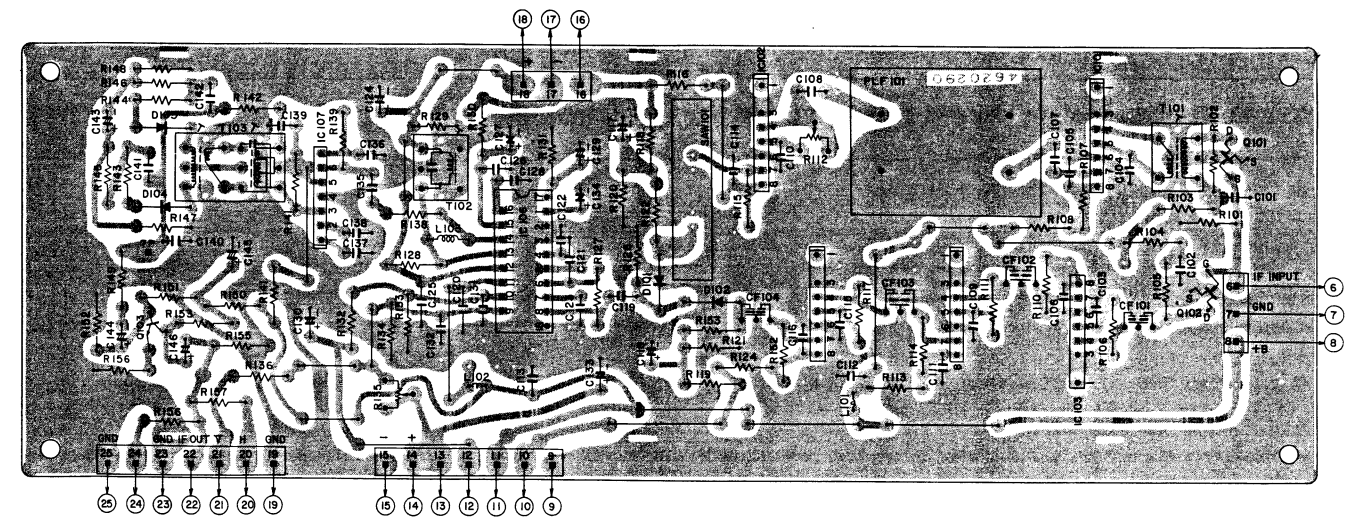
IF CIRCUIT BOARD (BOTTOM VIEW)
